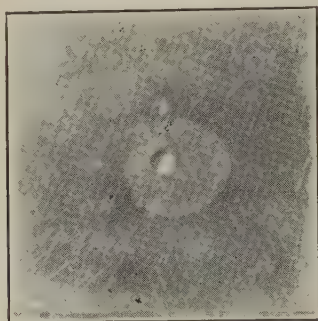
Showing a Typical Impression Made in a Block of Steel With the Brinell Hardness Testing Machine.
